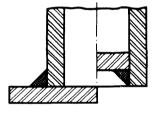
EXAMPLES OF ACCEPTABLE CORNER WELDS FOR PRESSURES NOT OVER 30 psi
